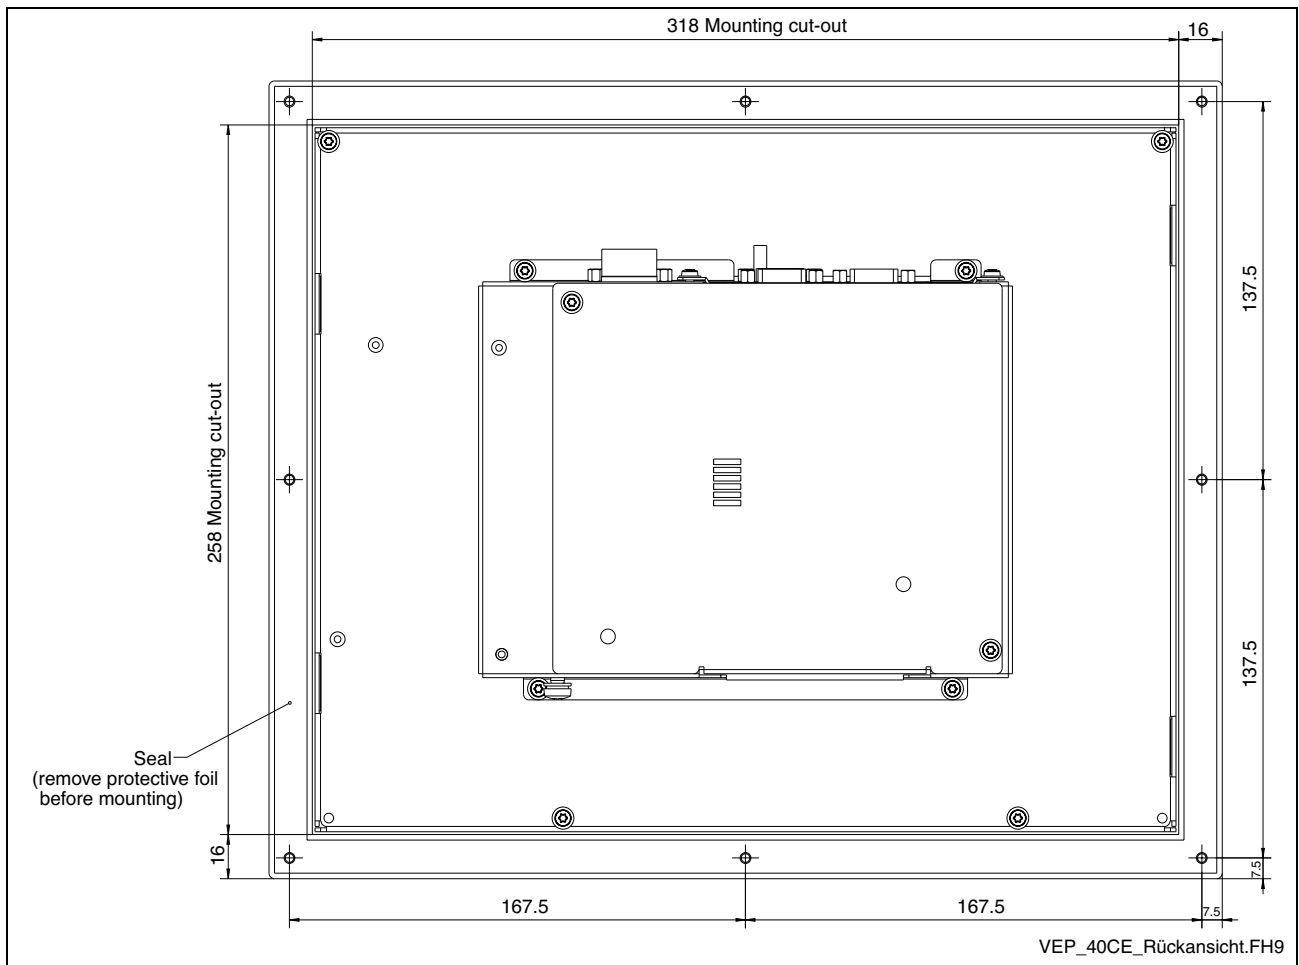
Mounting dimensions of the IndraControl VEP 40.1CE
